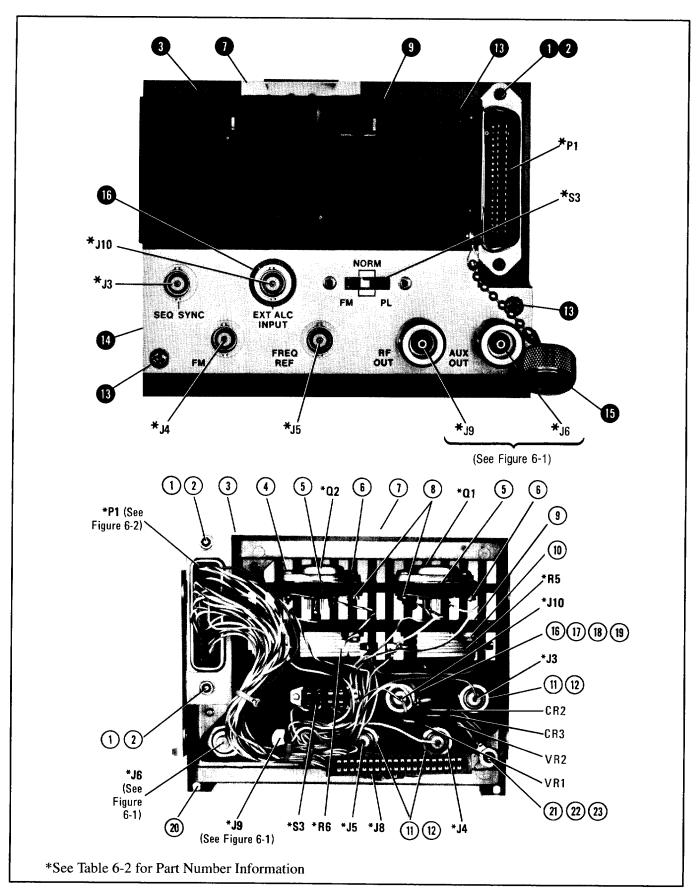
Rear Panel Parts Identification (3 of 4), Option 004
